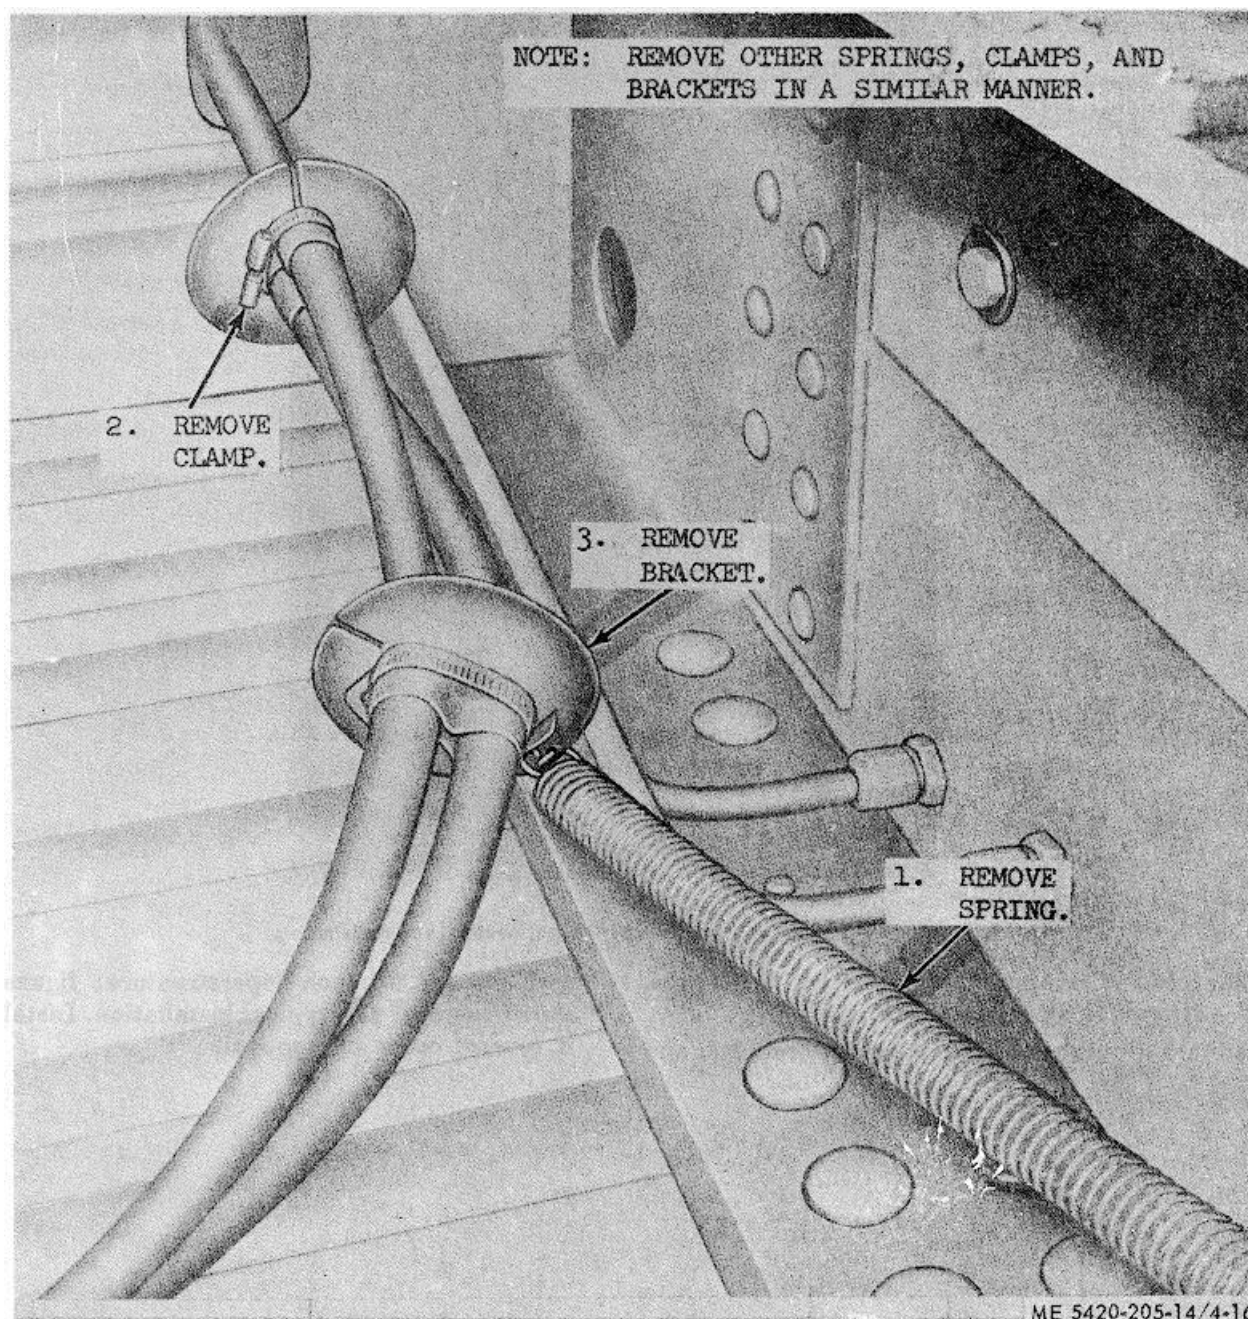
Typical hose clamp, bracket, and spring, removal.
